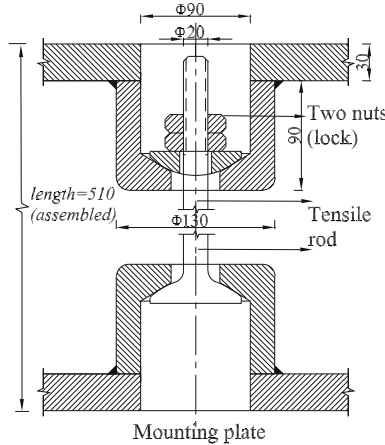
Central tensile-rod arrangement for the axial compression of helical springs in the assembly stage, dimensions as of Fig. 2b, Khalid [8]
